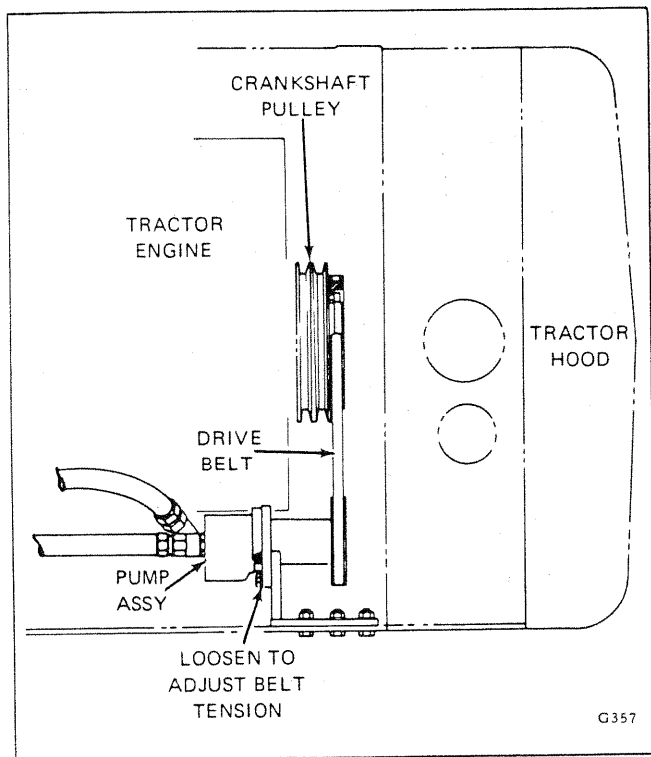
REMOVAL OF HYDRAULIC PUMP ASSEMBLY (D5 TRACTOR SERIAL NUMBER 81H1 THROUGH 84H1 AND UP)
